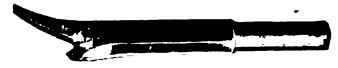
TUBE BEADING TOOL—PNEUMATIC
